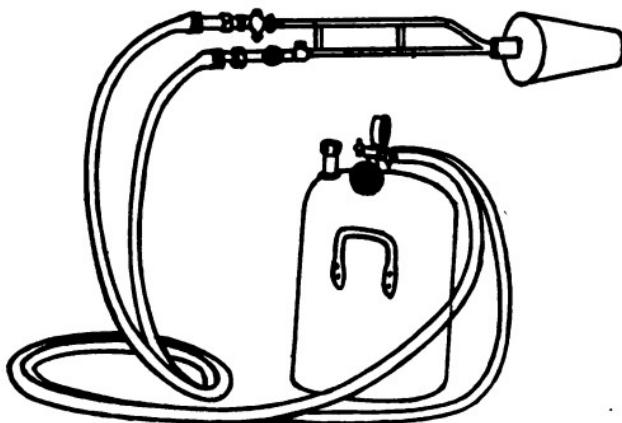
Portable Preheater and Annealer. Compressed Air Type
